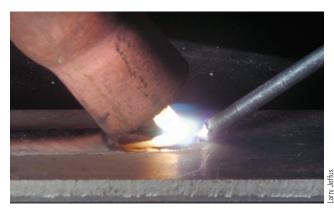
Aluminum filler being correctly added to the molten weld pool.
